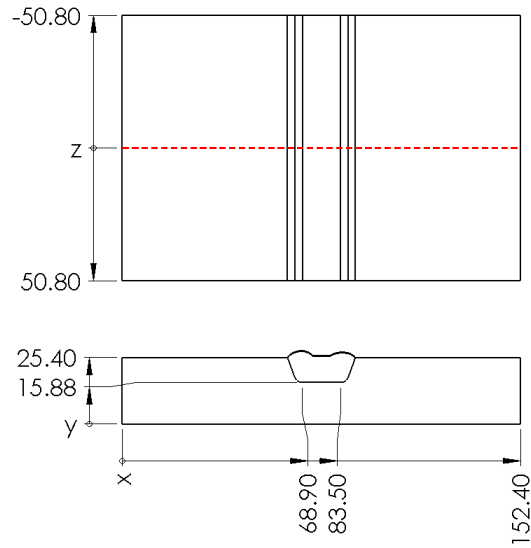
Titanium electron beam welded plate dimensions and measurement location (dimensions in mm)
